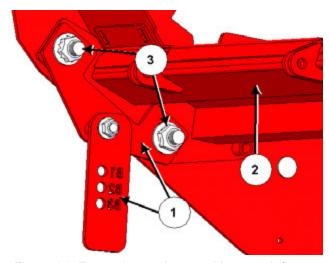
Fasten lower sheet and hanger deflector to front tub wall
